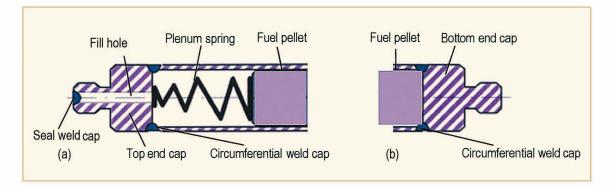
Examples of seal welding of a fuel rod: (a) – axial fill hole in the end plug, end-face seam weld; (b) – radial fill hole in the end plug for filling in process of implementing perimetric seam, Shishov, 2006.
